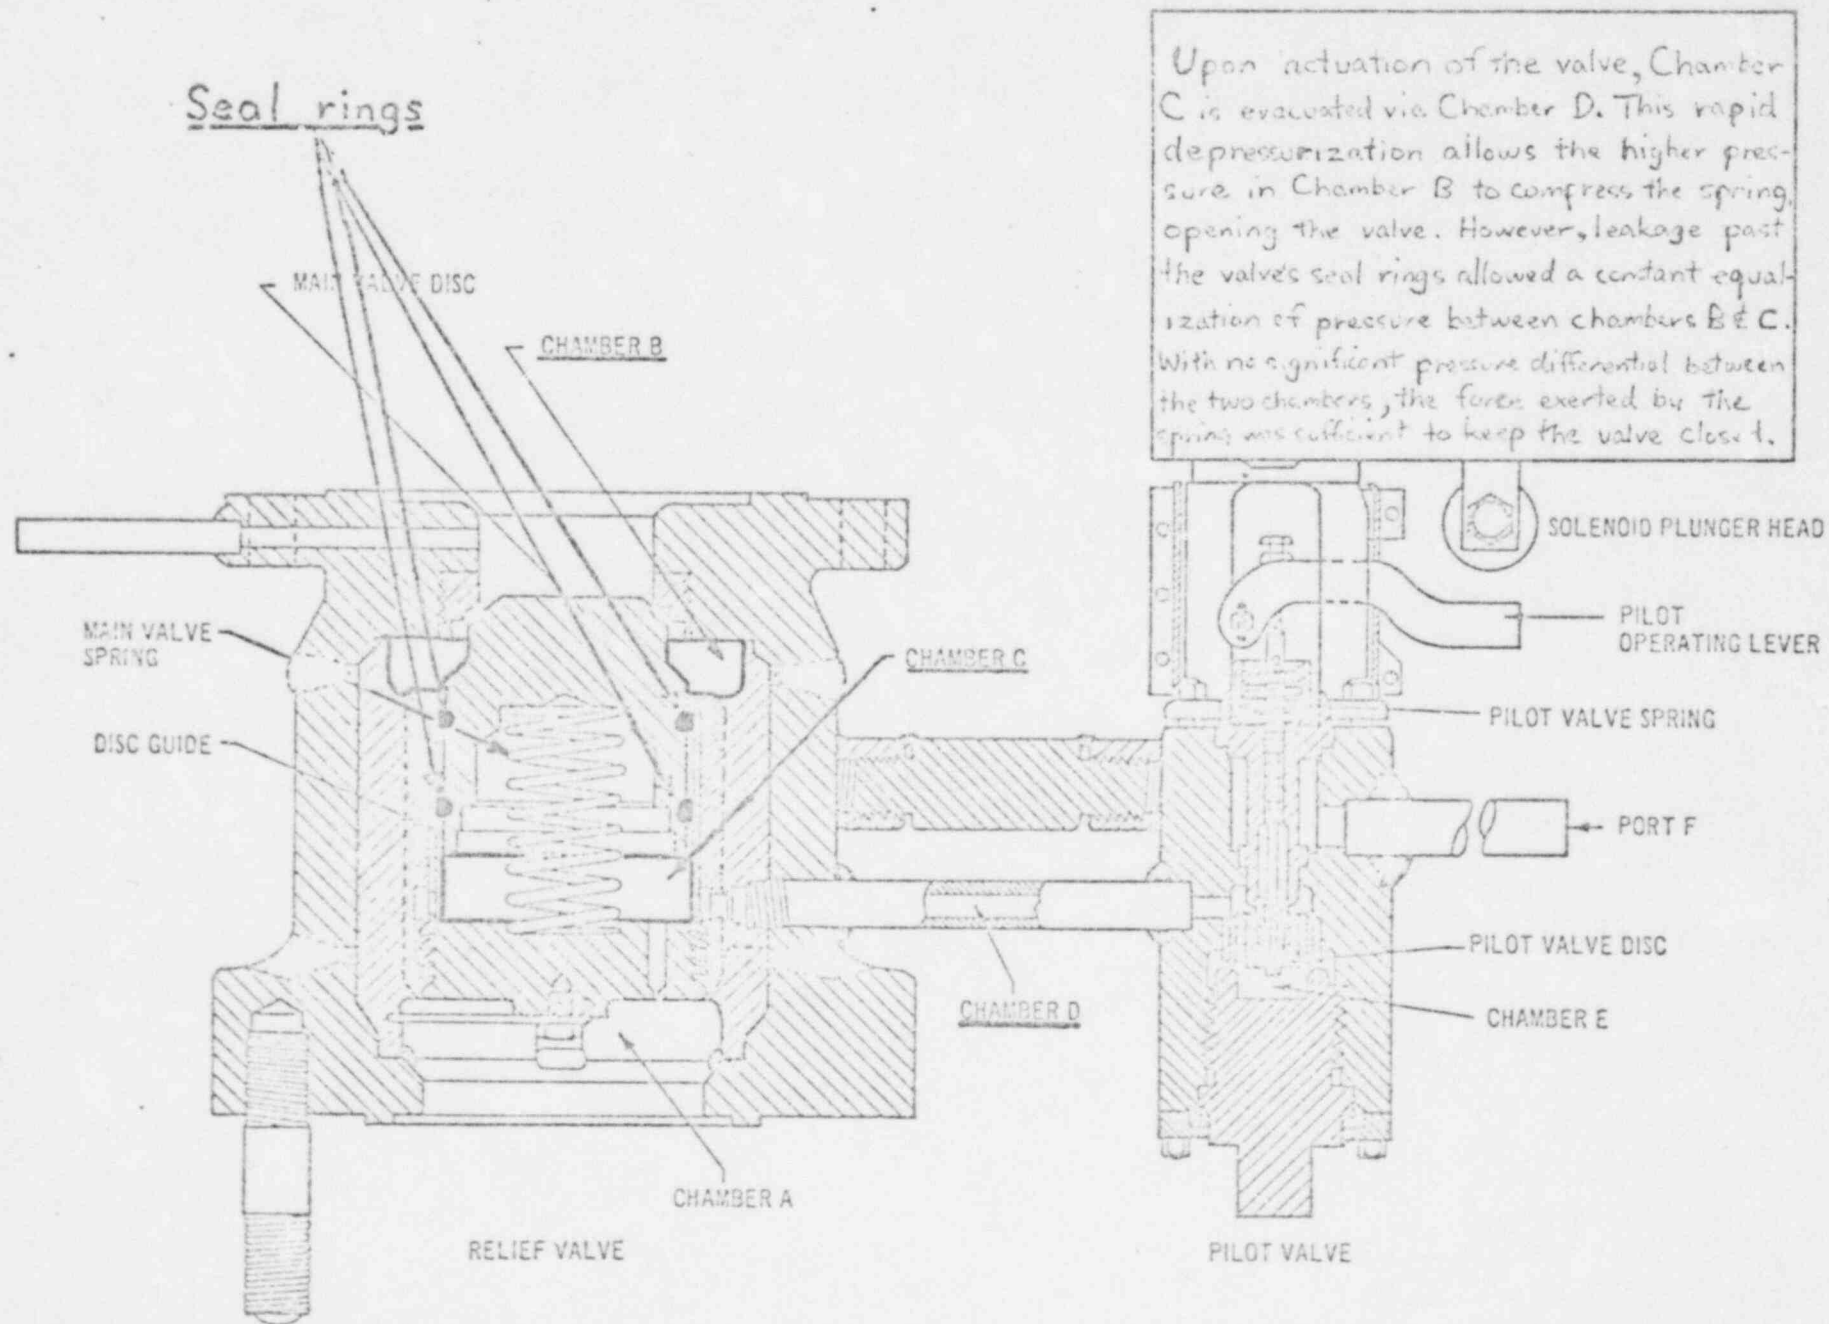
RELIEF VALVE (CROSS SECTION)
